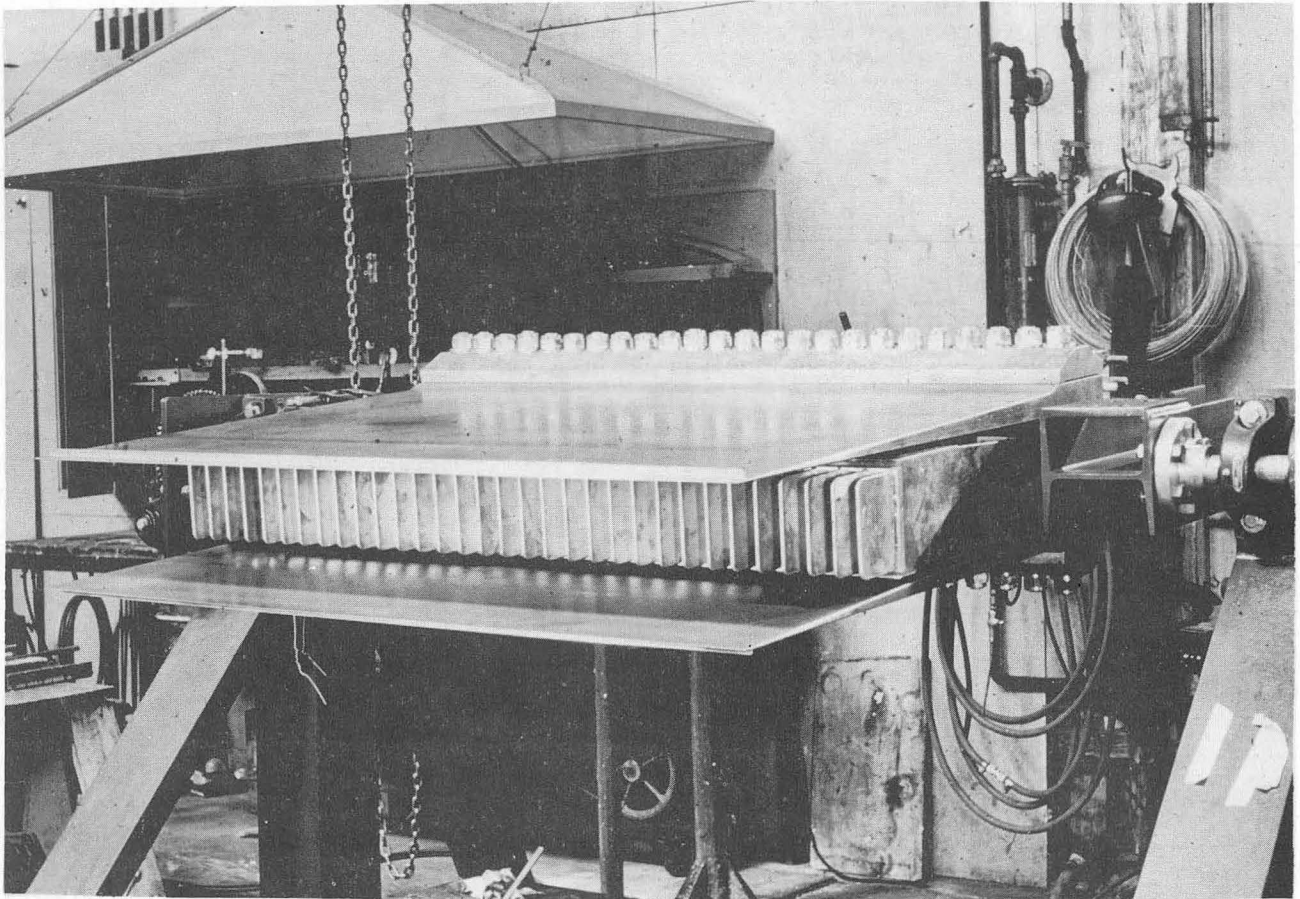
Winding setup used in fabricating 18-inch vacuum pipe.
